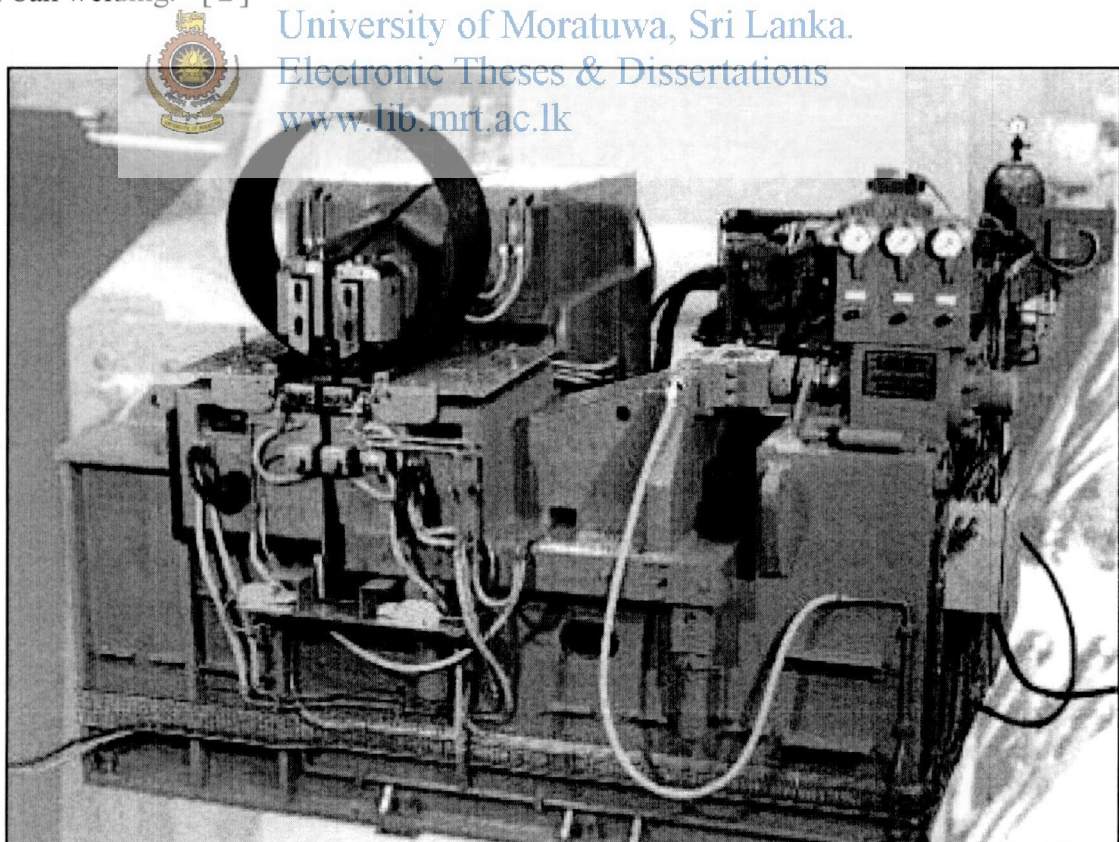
Flash Butt Welding Machine for Band Welding [ 2 ]
